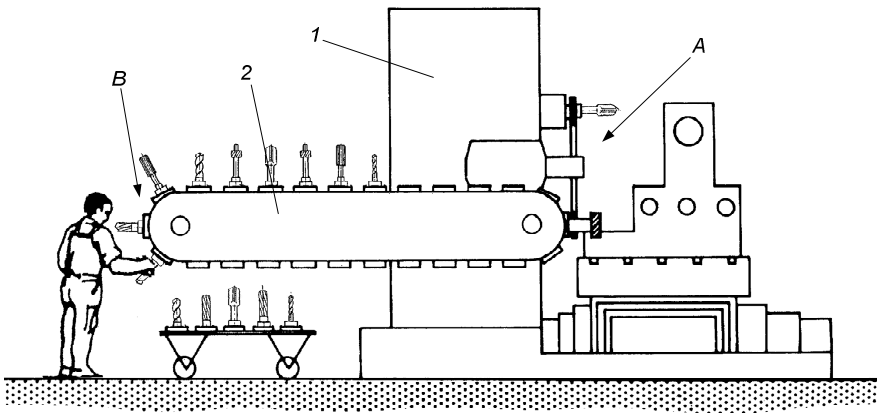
Changing* of tool in the machine spindle – A, and *exchanging* of tool in the tool-storage matrix - B: 1 – machining center, 2 – tool matrix
